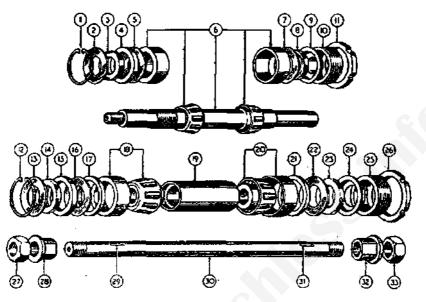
ARRANGEMENT OF WHEEL BEARINGS. (Top) Front : (bottom) rear.
